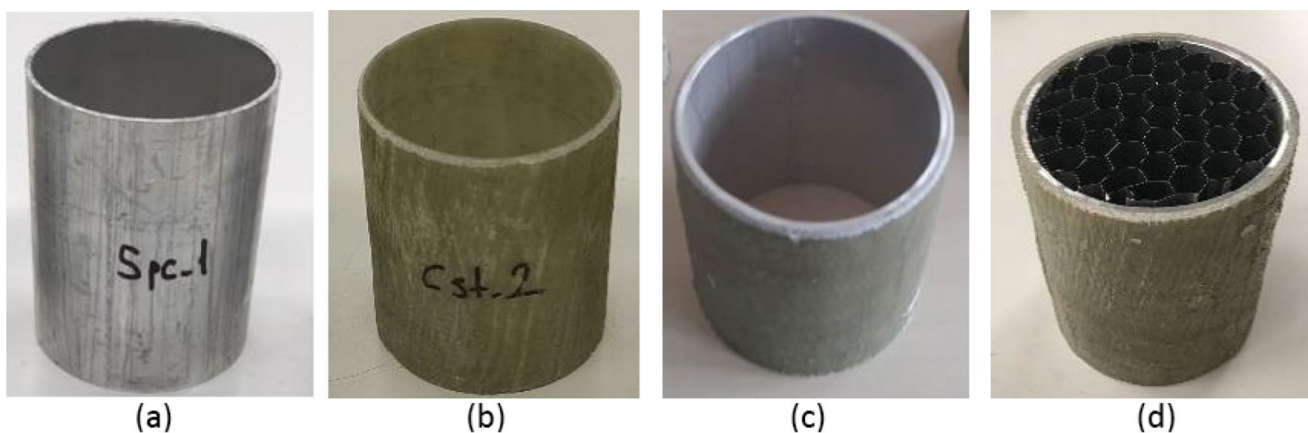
Test specimens a aluminum 6082-T6 tubes b GFRP tubes c hybrid tubes d honeycomb filled hybrid tubes
